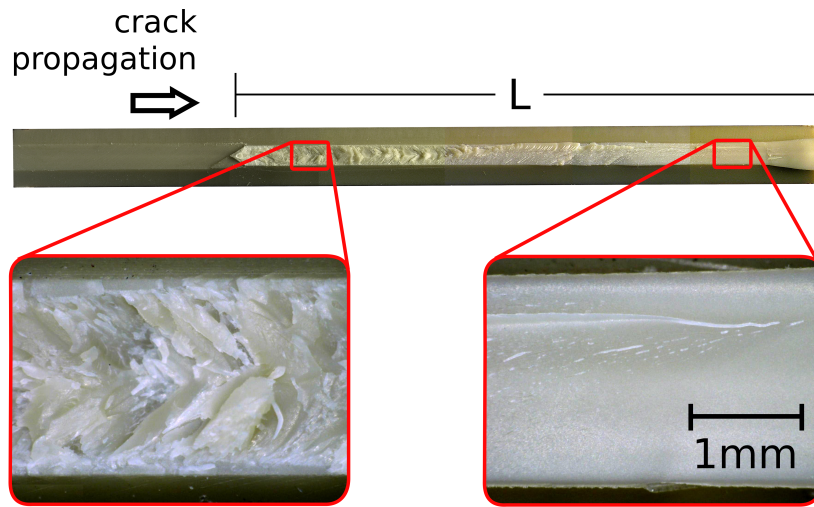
Microscopy image of PEEK specimen fracture surface. Left detail: First part of crack surface, rough with complex structures. Right detail: Much smoother surface at the end of the crack.
